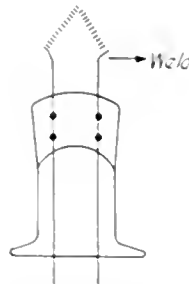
Showing Shape and Position of Filament After Being Electrically Welded to Leading in Wires
